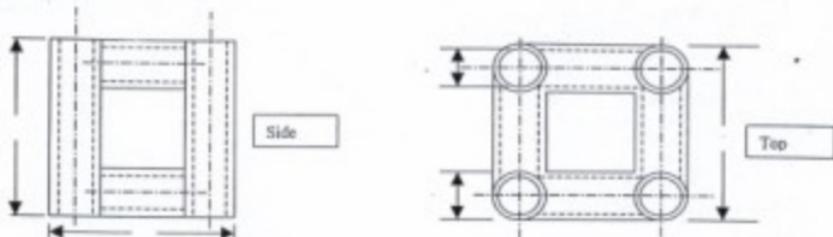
Schematic Drawing of the Three-Dimensional Tubular Absorber.
